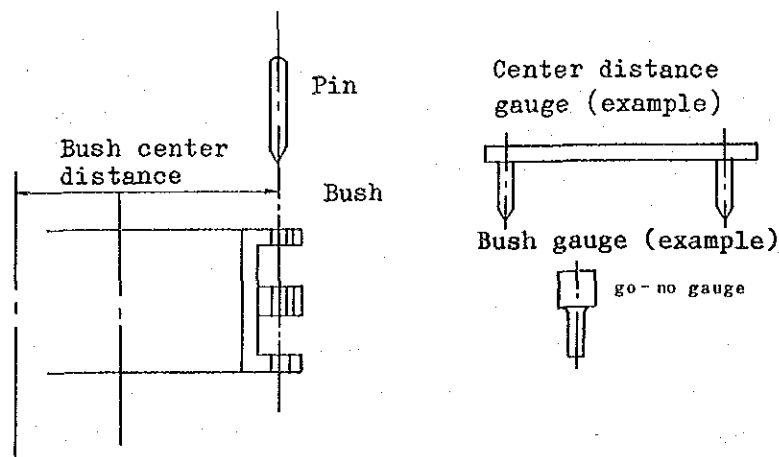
Example of pin, bush, and gauge for checking pin/bush accuracy
